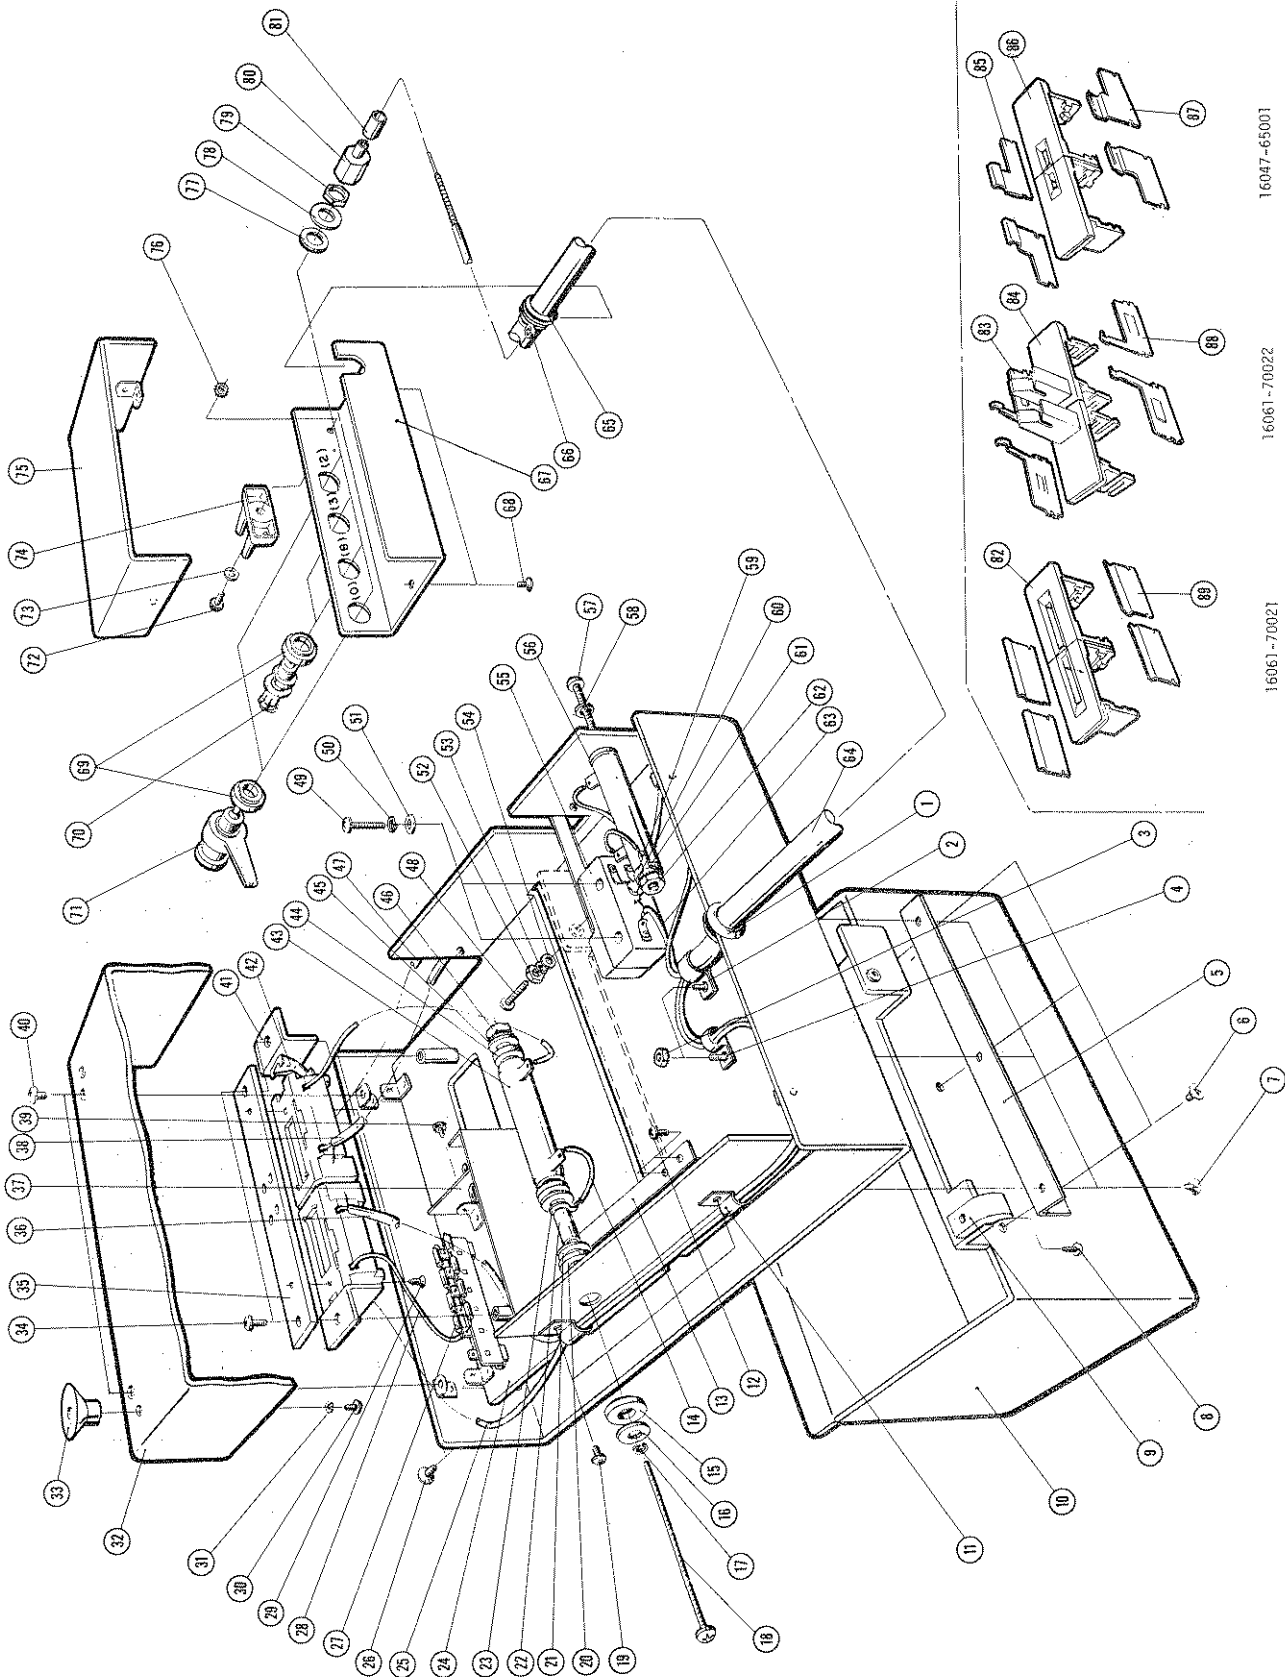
Parts Identification for 16047A (Sheet 1 of 2).
